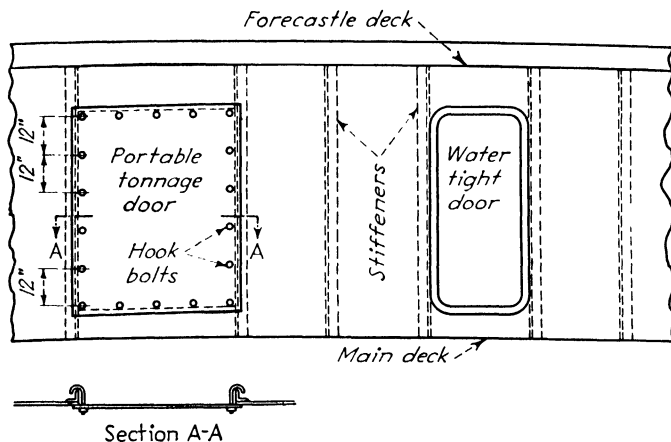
Tonnage opening in bulkhead *nominally* nonwatertight (no gasket). Watertight door at right is used for access (see Fig. 7).
